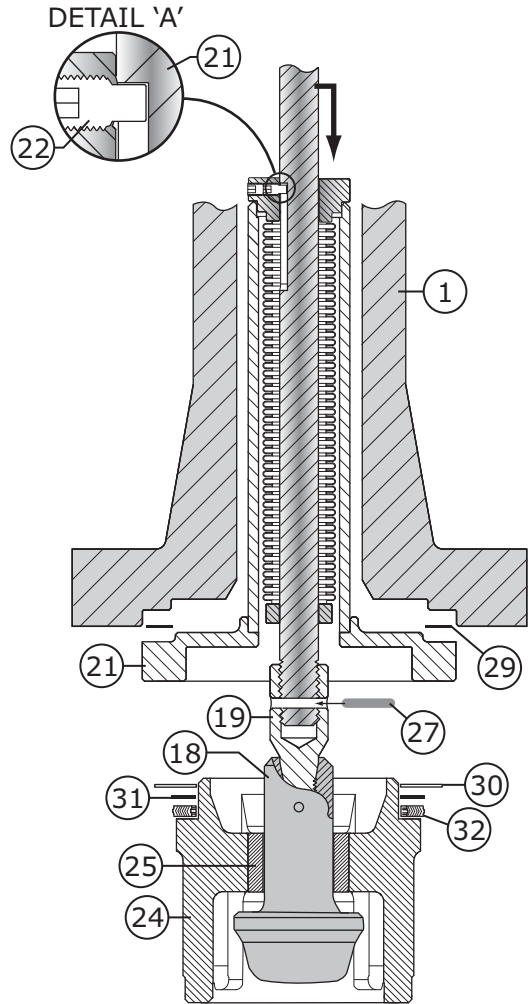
363 Control Valve Bellows Style Bonnet Assembly Diagram
